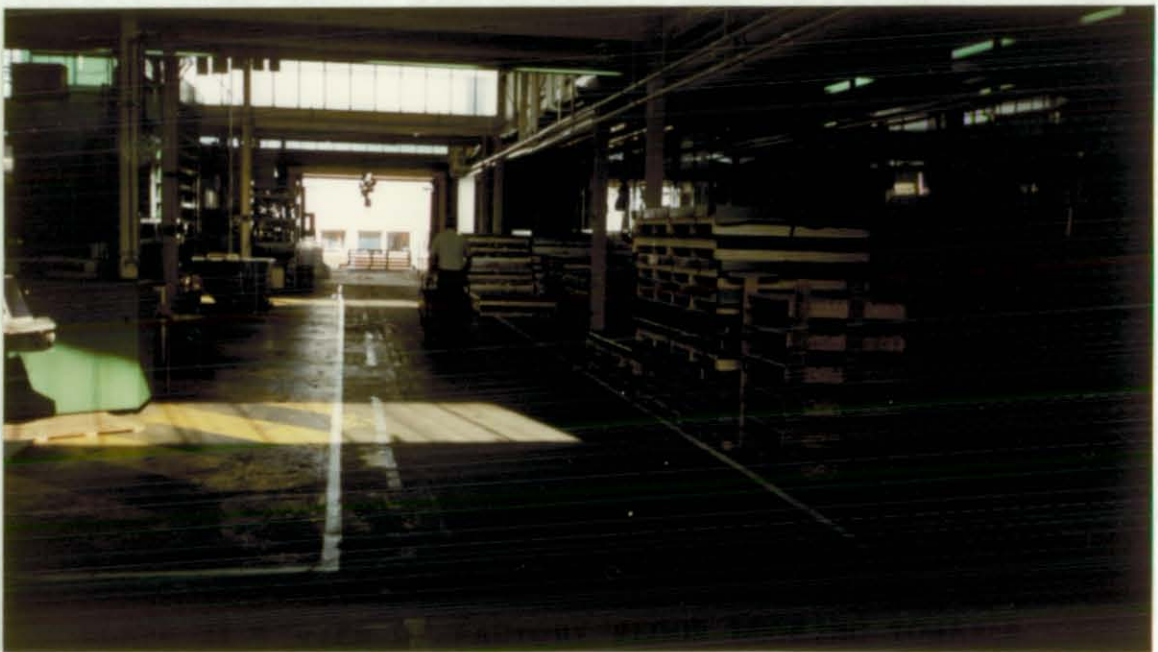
VIEW OF FACTORY FLOOR LOOKING TOWARDS
